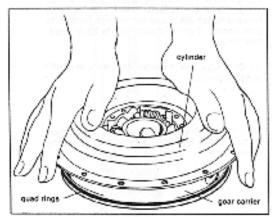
Pressing Cylinder on Bevel Gear Carrier
